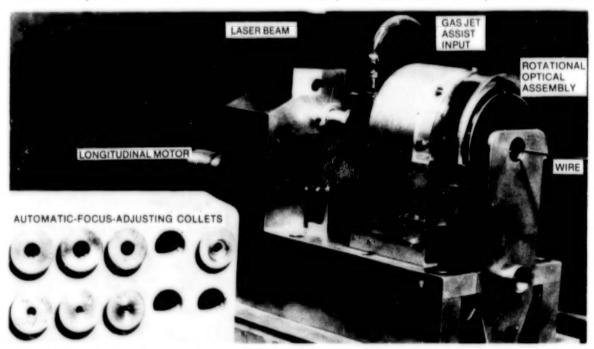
A collet for each wire size from AWG 26 to AWG 1/0 is part of the equipment for the laser wire stripper. The collet holds the wire and automatically positions the focusing lens.
